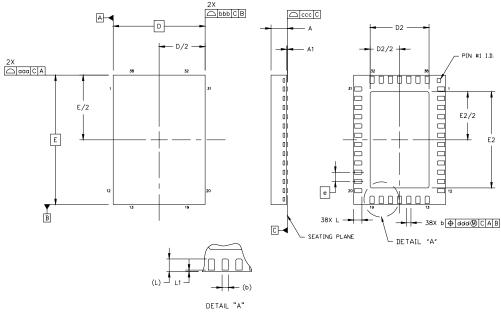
38-Pin Quad Flat No-Lead Package (QFN)
